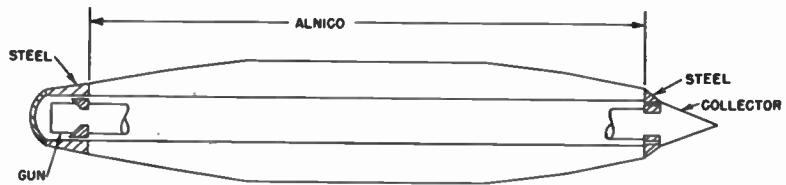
Proposed design of magnet for tube with built-in pole pieces.
